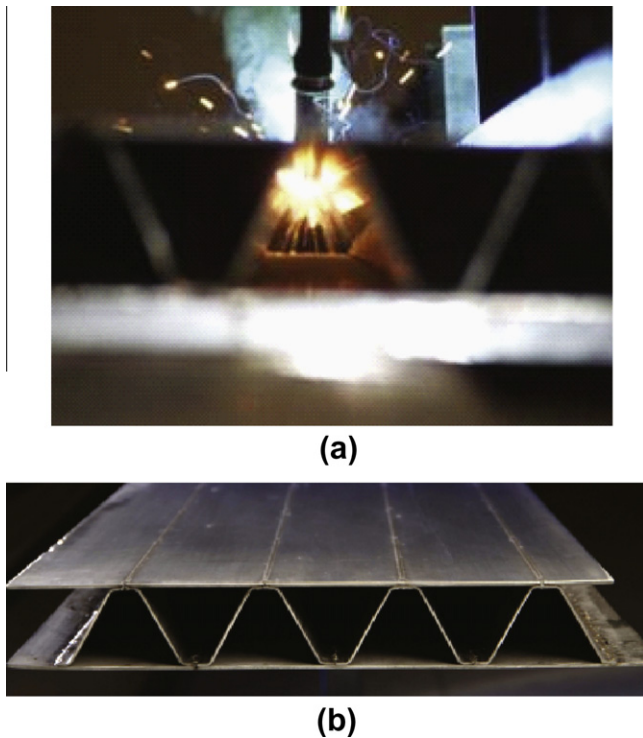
Fabrication of laser welded steel sandwich panels, (a) laser stake welding of prismatic cores to facings and, (b) post production laser welded sandwich panel (Applied Thermal Sciences Inc., Sanford, Maine, USA).
